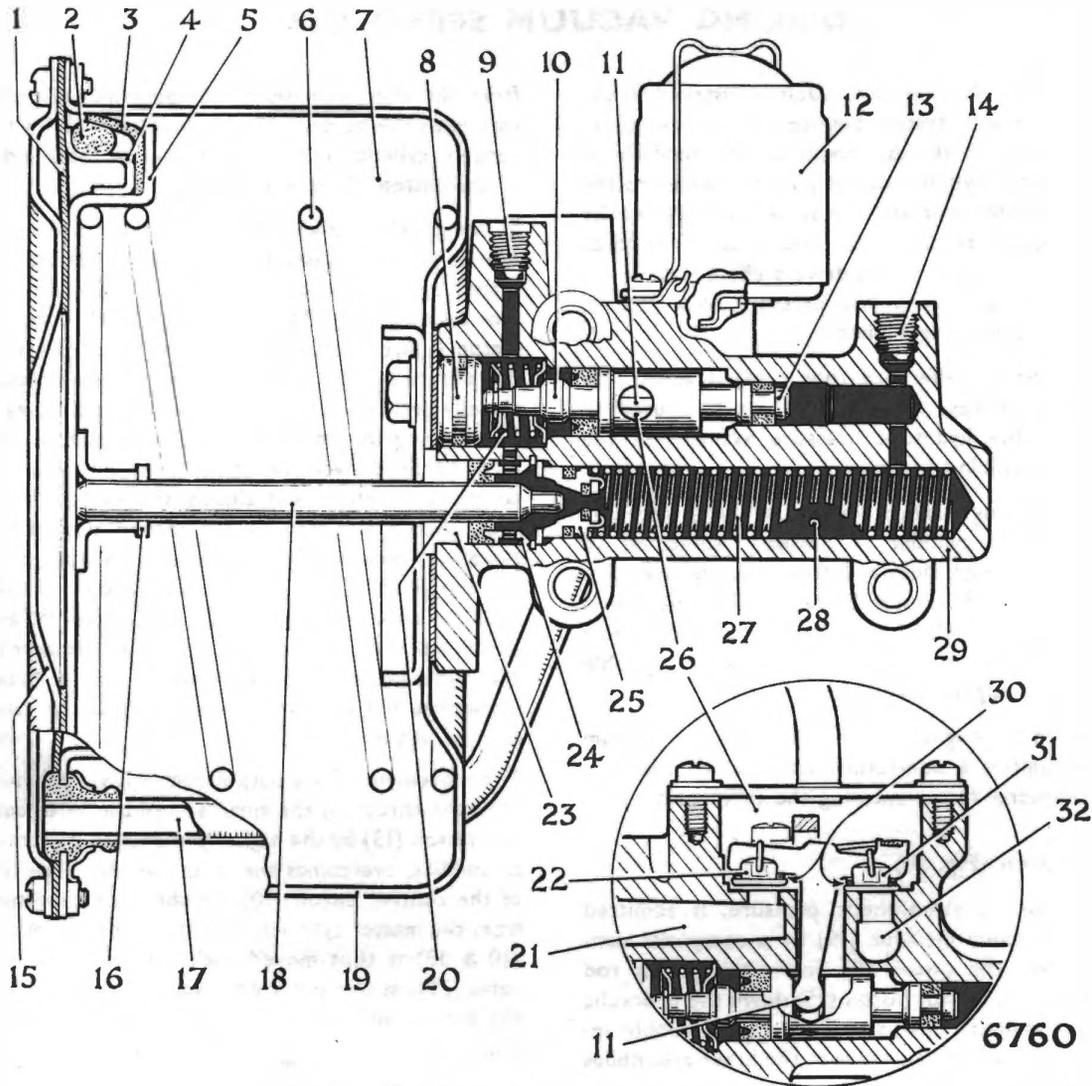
Cross section view of Girling Vacuum Servo Unit
